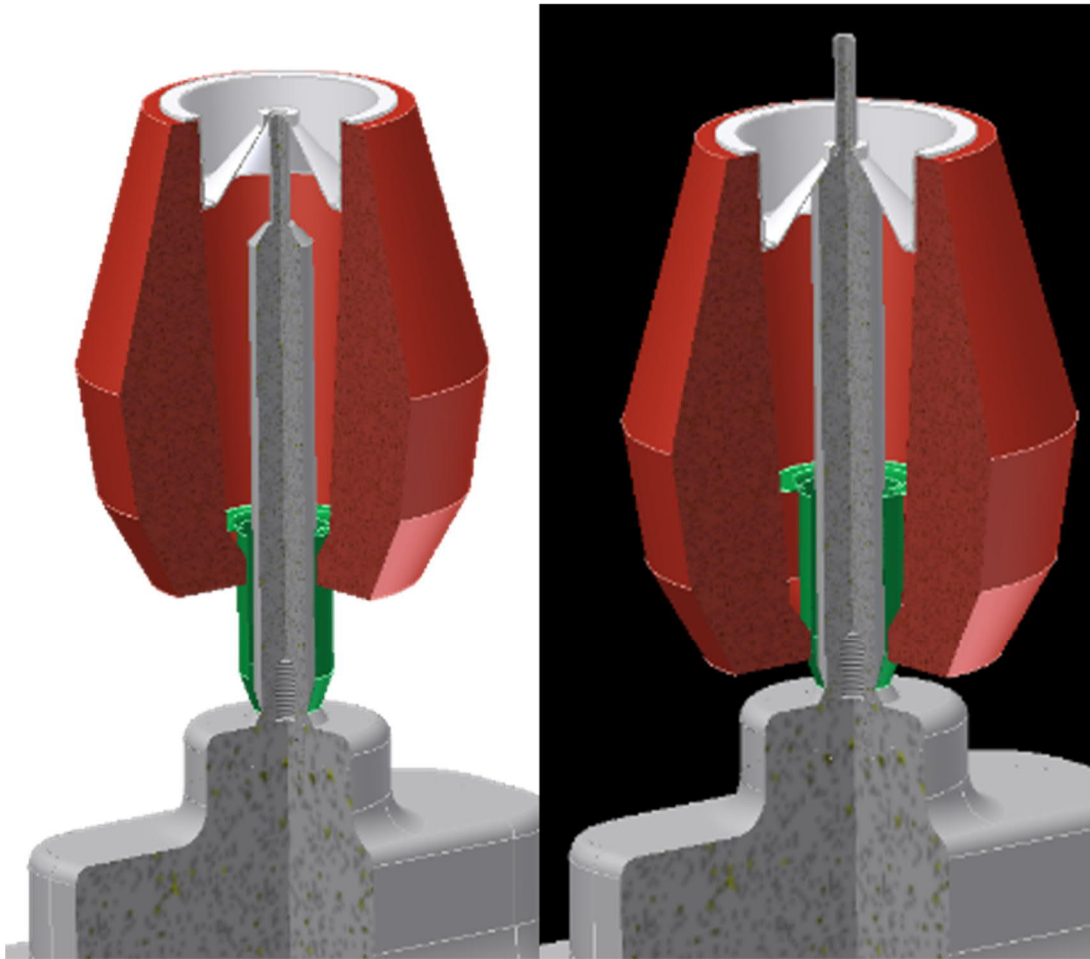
ASK KL mini riser in (1) elevated position after mould preparation and (2) in final position after pouring moulding sand and pressing the feeder down.
